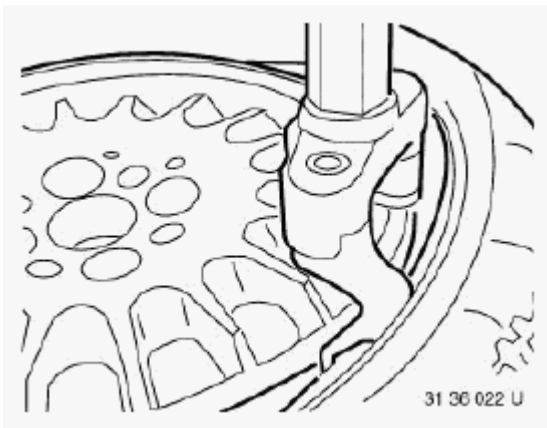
Pressing Upper Tyre Bead Under Mounting Finger
